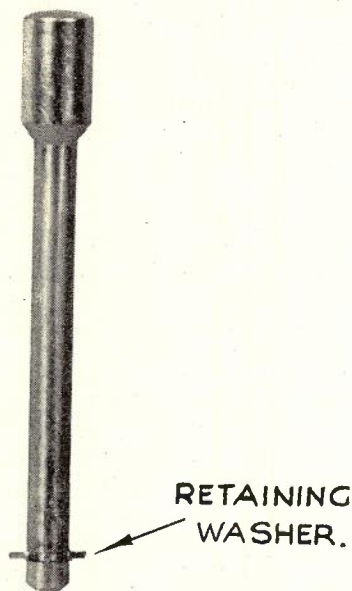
Chromium Plated Plunger Complete with Removable Retaining Washer.
